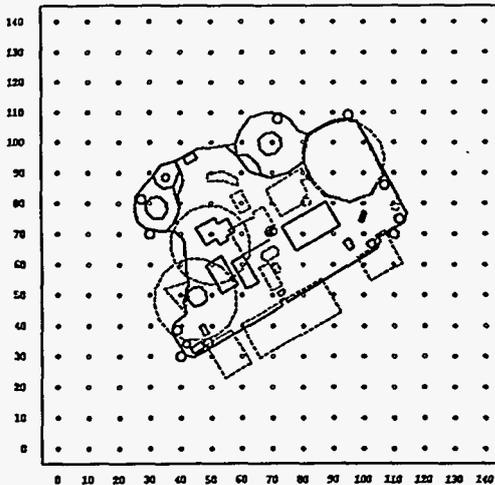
Optimal assembly pallet design for the cassette player. Additional support for the motor during assembly should be designed manually.
